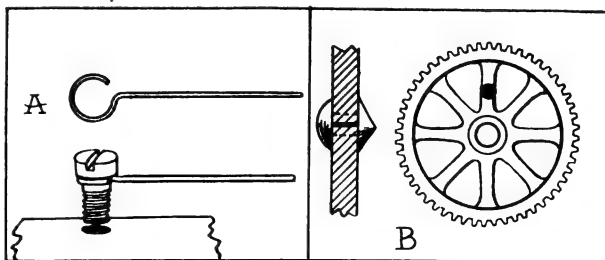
A, Method of Handling Bolts and Screws in Places Inaccessible for the Hands; B, Broken Spoke of a Gear Repaired by Riveting.
